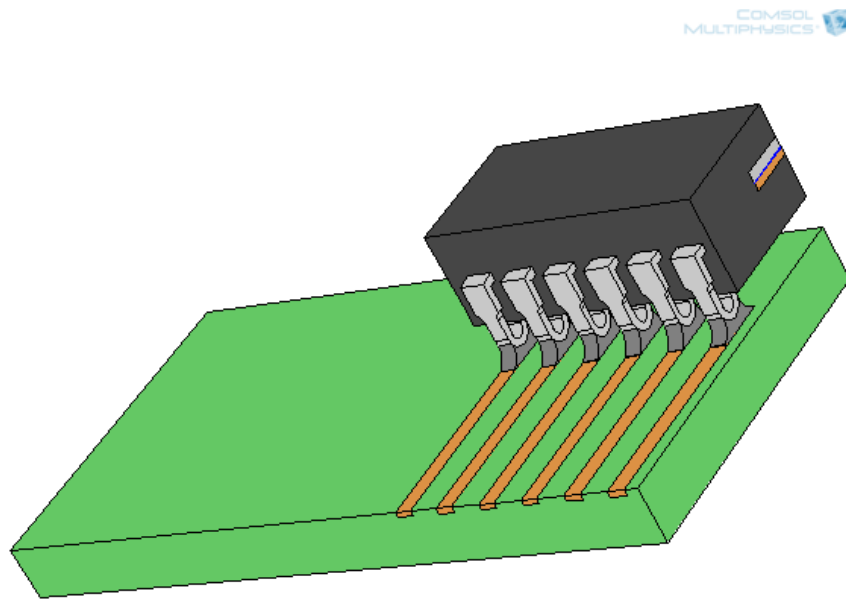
Image showing a quarter (because of symmetry) of a surface mounted J-lead chip carrier on a PCB.
